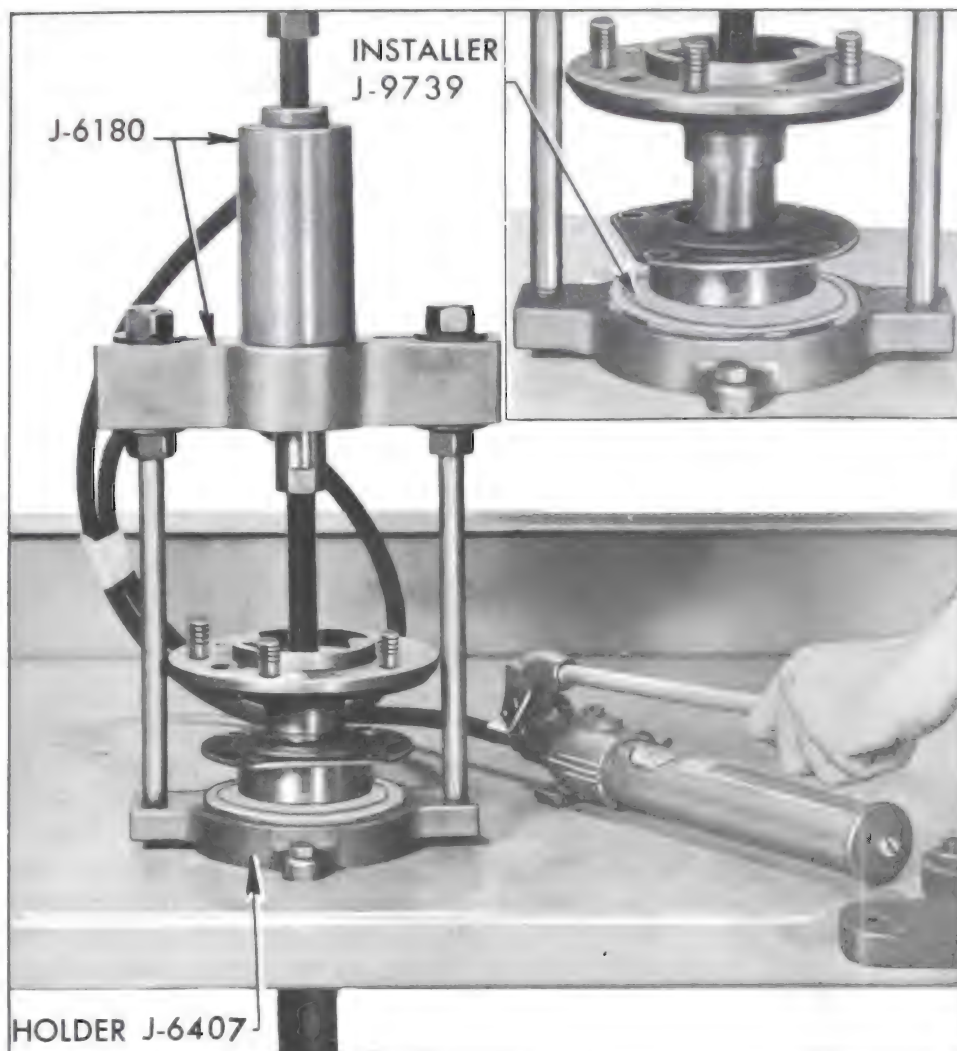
Installing Rear Wheel Bearing or Retaining Ring
